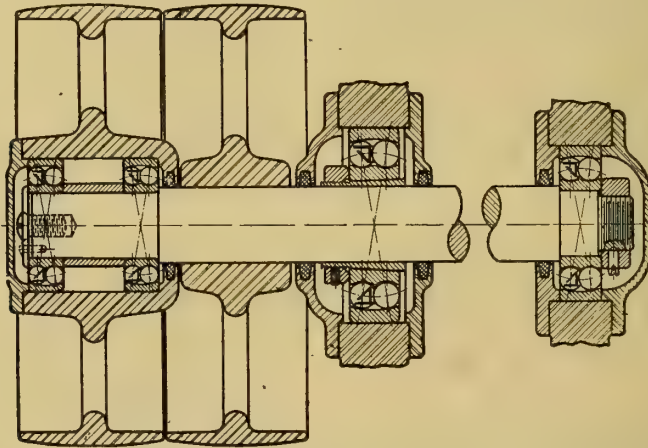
Mounting of Radial Bearings on Loose Pulley Countershaft Illustrating the Feasibility of Using Ball Bearing Mountings Where Shaft Sizes Cannot Readily be Altered.
